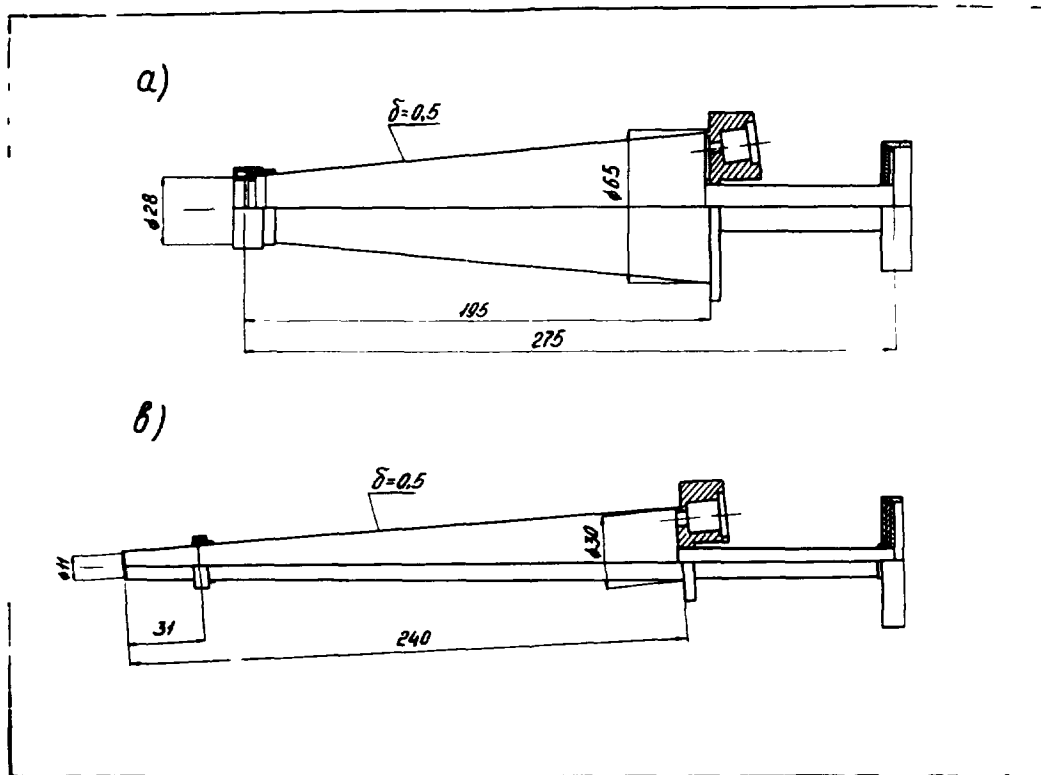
Geometry of target chamber (sizes are given in millimeters):
